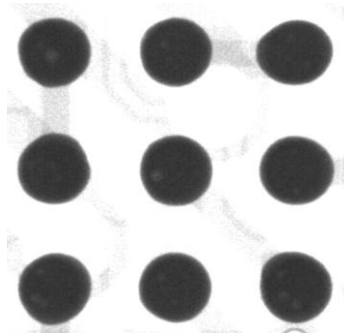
X-Ray image of BGA solder joint reflowed with SAC305 solder paste. Little voids were seen
